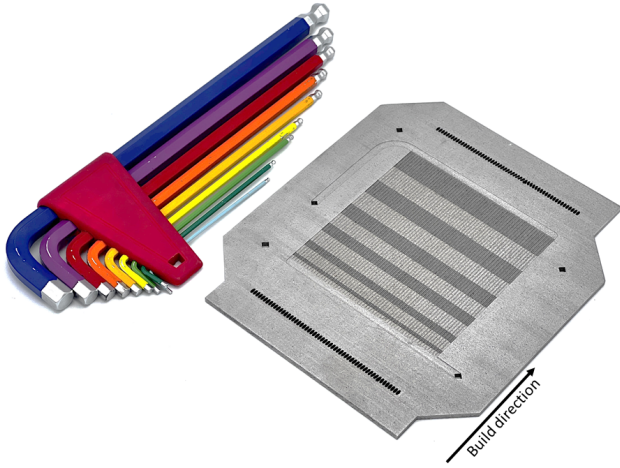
Additive manufacturing of the Design B using PBF-LB/M technique.
